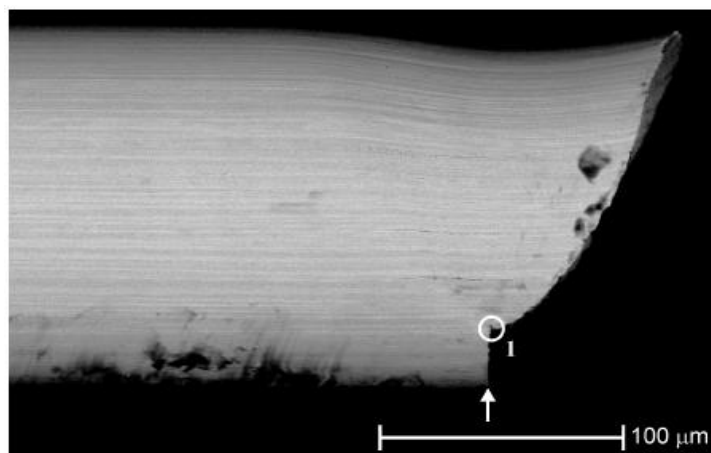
Growth of the long fatigue cracks perpendicular the wire axis [1].
